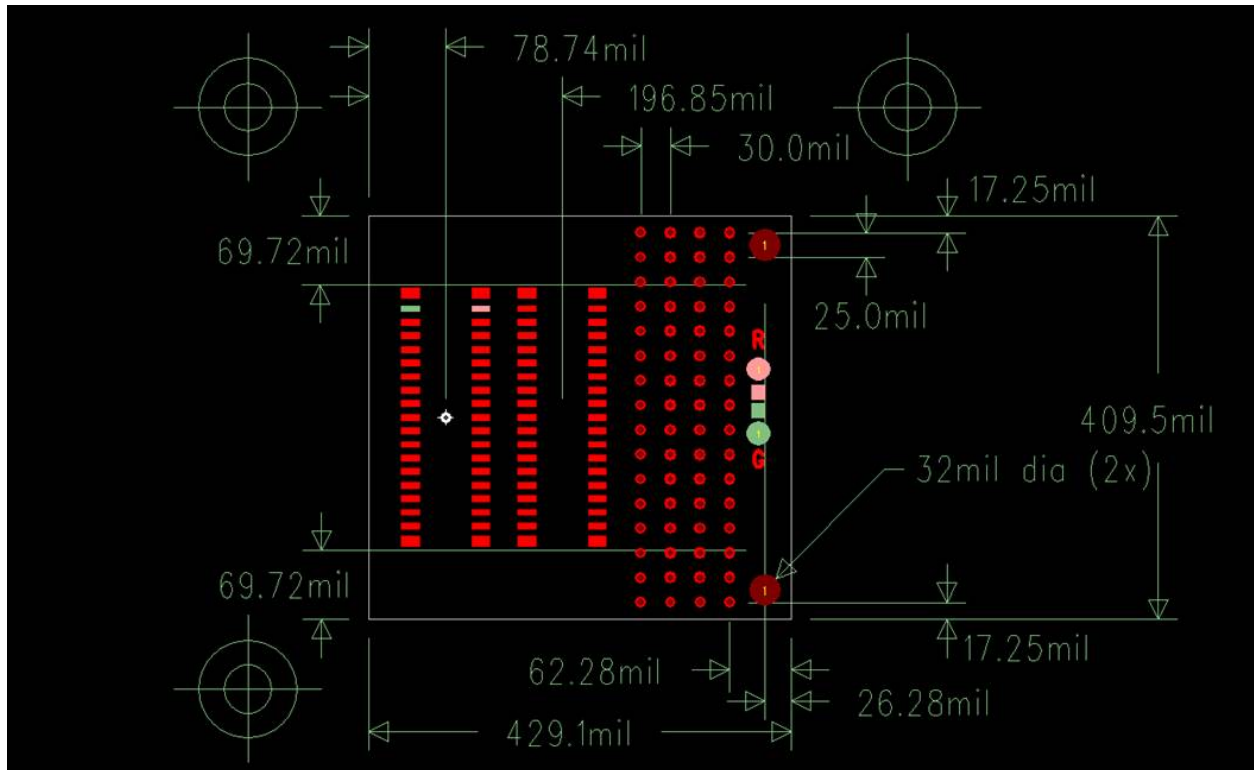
Manufacturer schematic of PCB redesign with all relevant measurements. Due to industry conventions, dimensions are listed in units of thousands of an inch.
